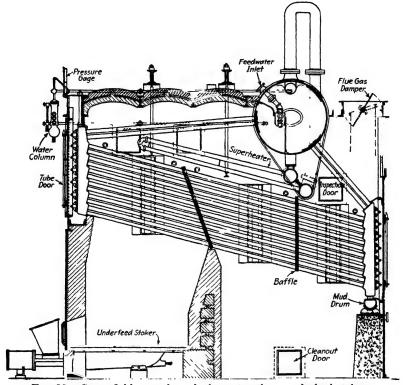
Springfield cross-drum boiler, set with ar inderfeed stoker.
